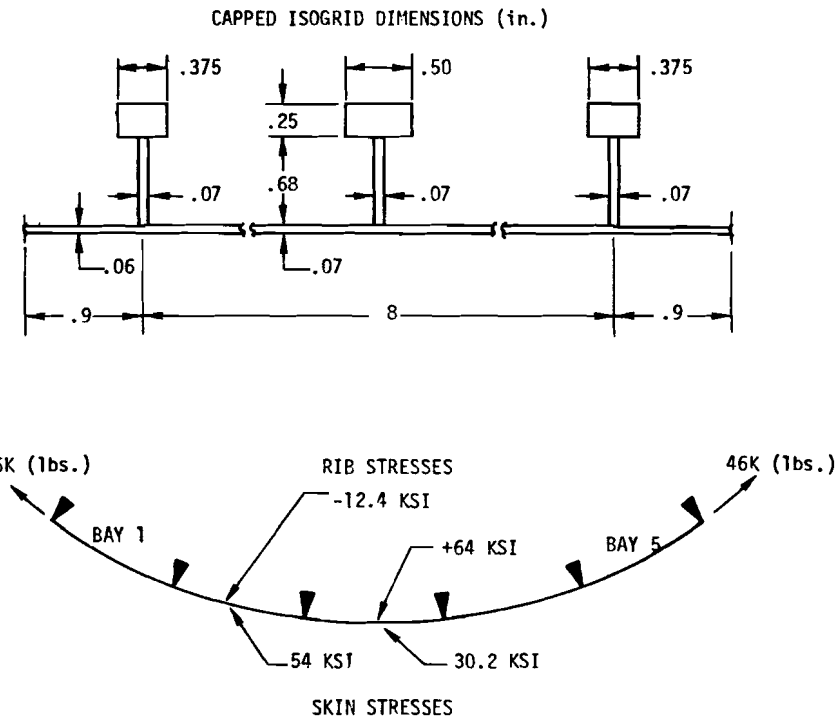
FUSELAGE ISOGRID SIDEWALL DESIGN TO RESIST FLOOR LOADS
